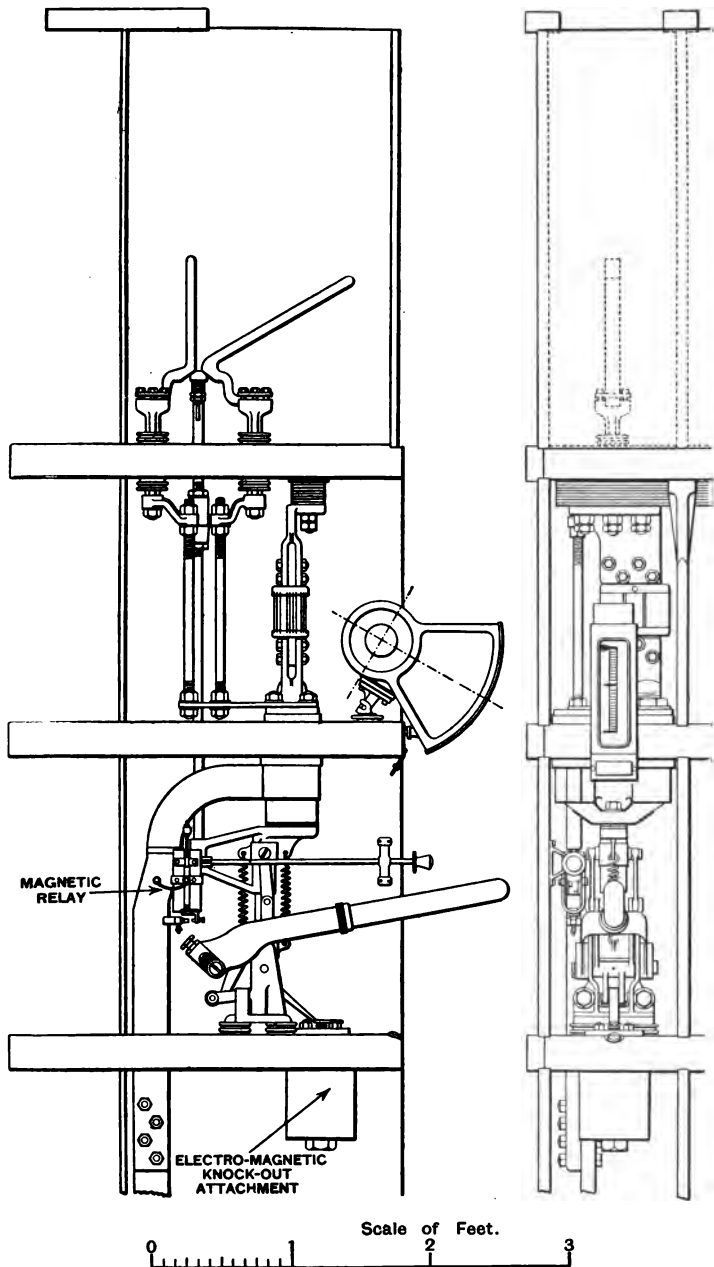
SWITCH GEAR WITH HORN CIRCUIT BREAKER.
